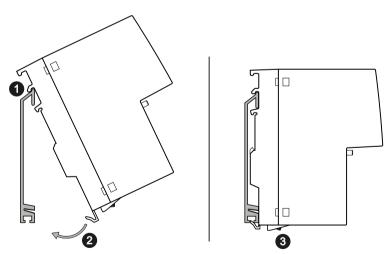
S7-300 mounting rail installation with the securing bar in the wall mounting position.
